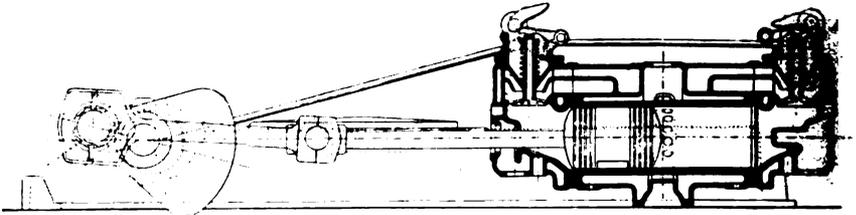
Sectional elevation, Mather & Platt Engine (Koerting type).
